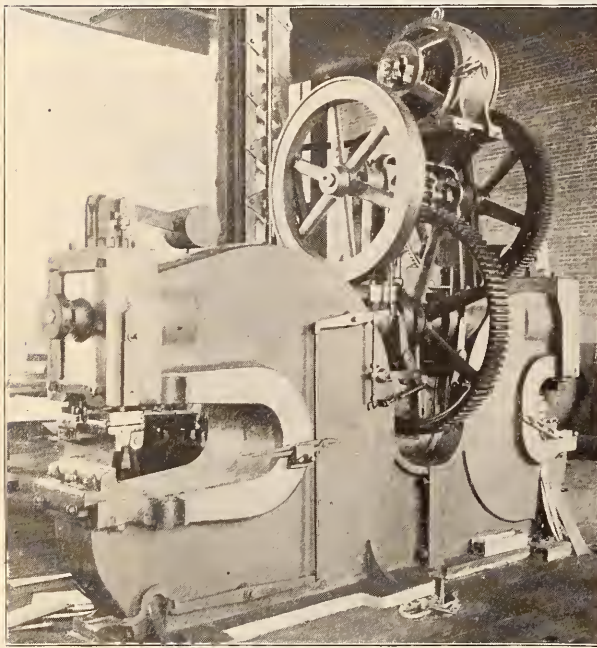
LONG & ALSTATTER PUNCH AND SHEAR, DRIVEN BY A 10 H. P. WESTINGHOUSE MOTOR—TERMINAL R. R. OF ST. L.
